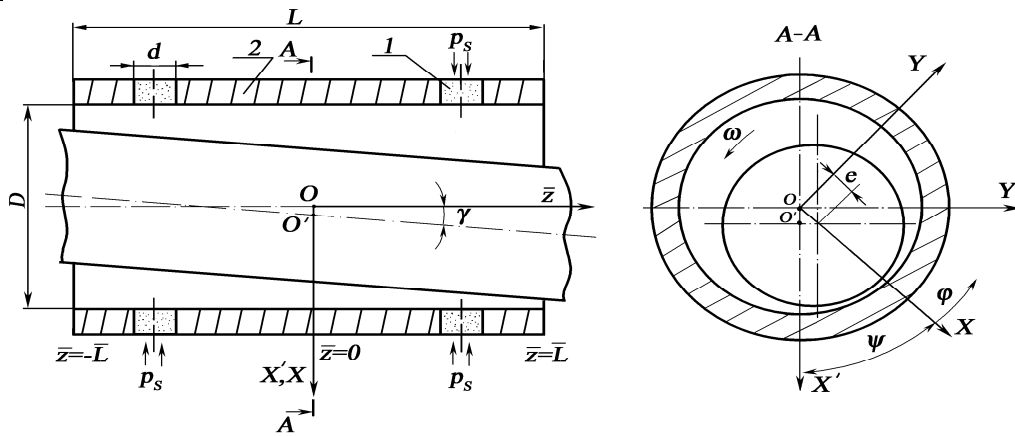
Diagram of spindle position in a double-row gas static bearing with porous inserts: 1 – porous insert, 2 – gas-tight surface of a shell
